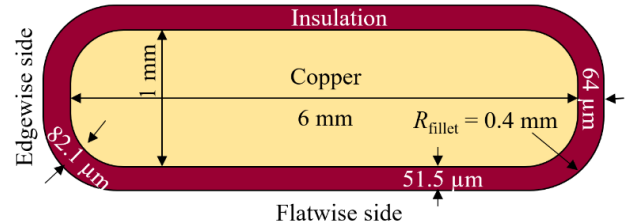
Unaged edgewise insulated wire cross-section dimensions.
